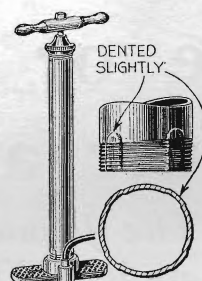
How dents repair the stripped threads of a tire pump in emergency
